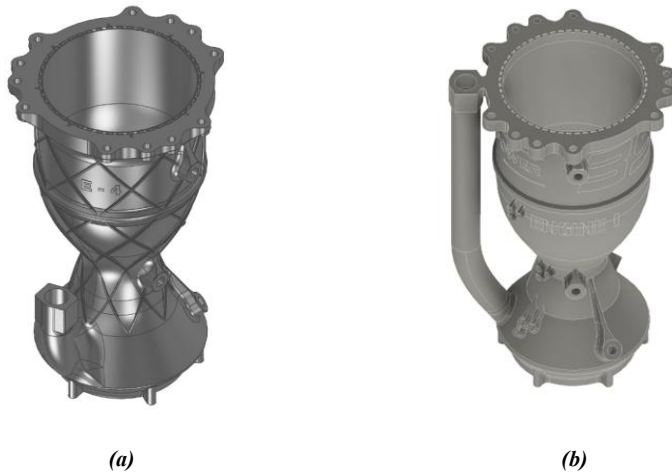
Full chamber CAD of (a) Engine-4 and (b) Engine-1
